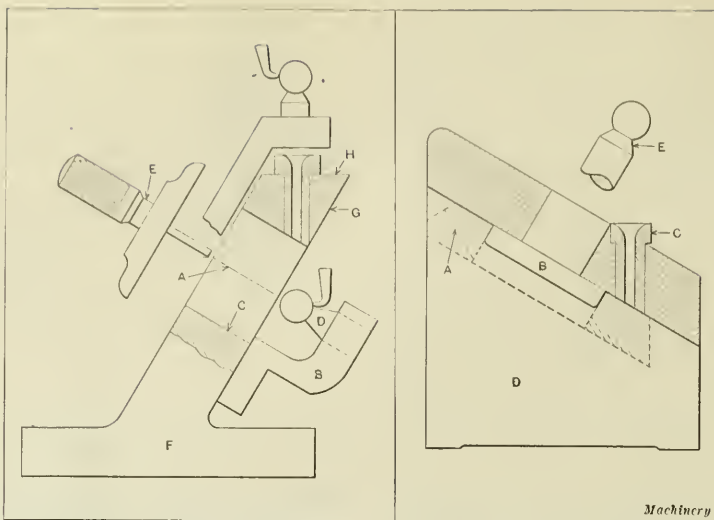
Jig for drilling Angular Hole in Stem of Fuse Body
